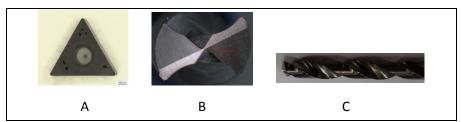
Selected prototypes: A) Prototype No1 insert for turning operations, B) prototype No2 drill head to drill a dead end boring and C) prototype No 3 a drill to drill composite material for aeronautic sector.
